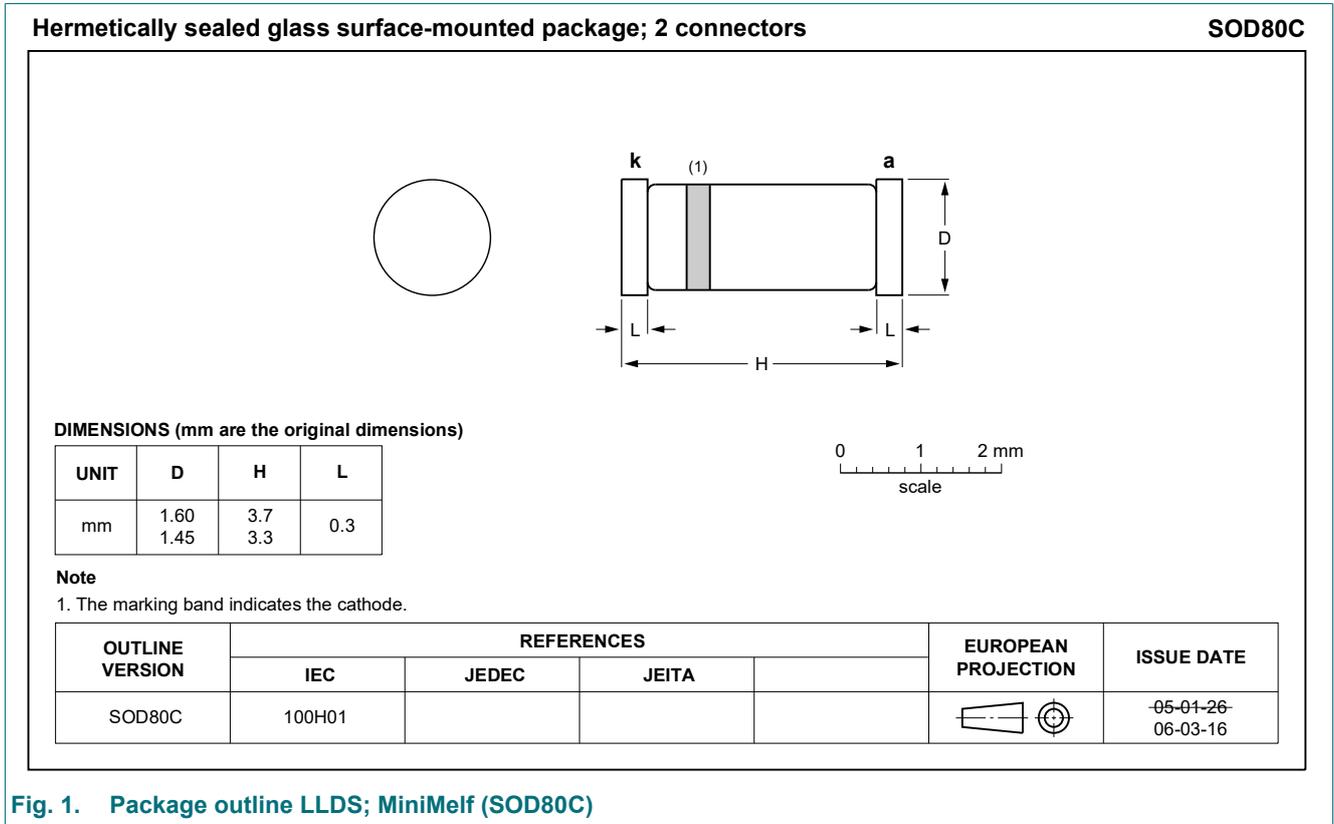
Package outline LLDS; MiniMelf (SOD80C)
